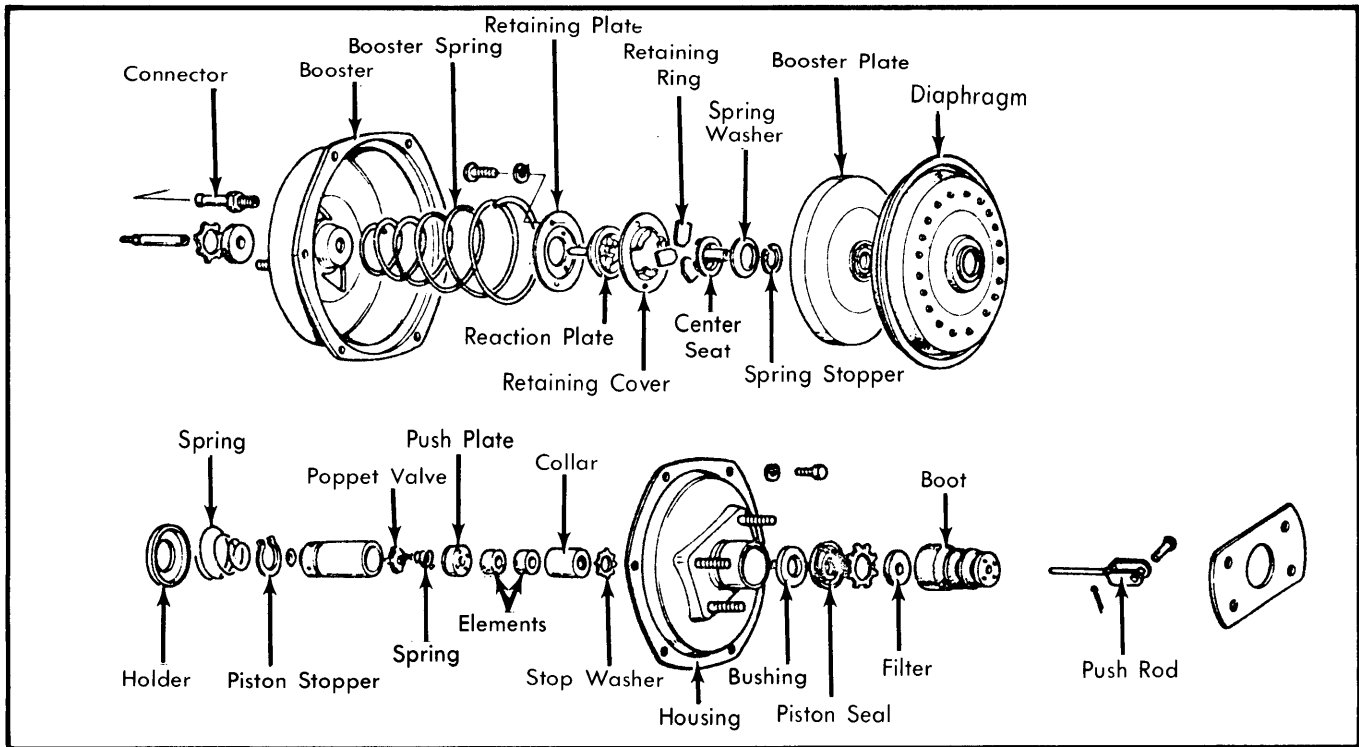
Exploded View of Power Brake Unit (Civic Shown; Others Similar)
